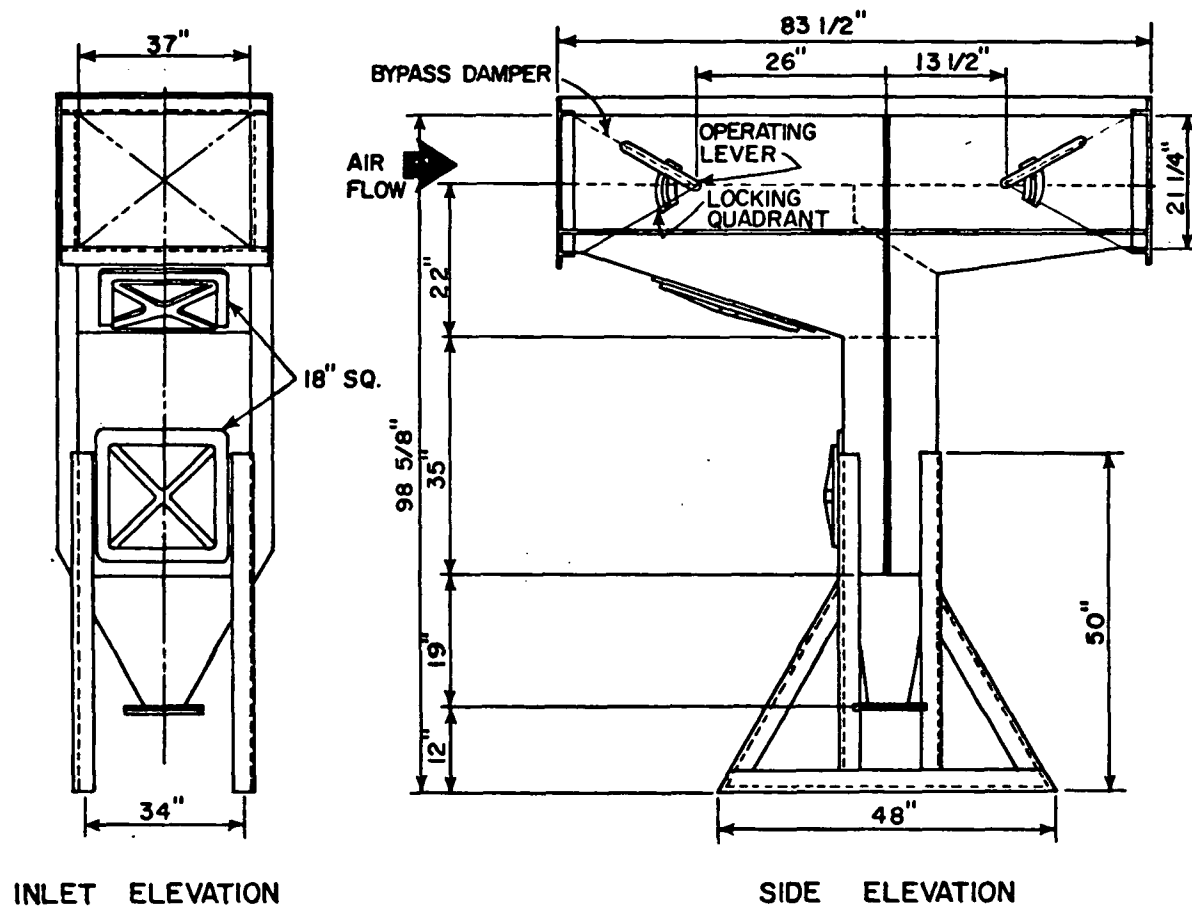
PILOT PLANT DRY DUST COLLECTOR OUTSIDE DETAILS
